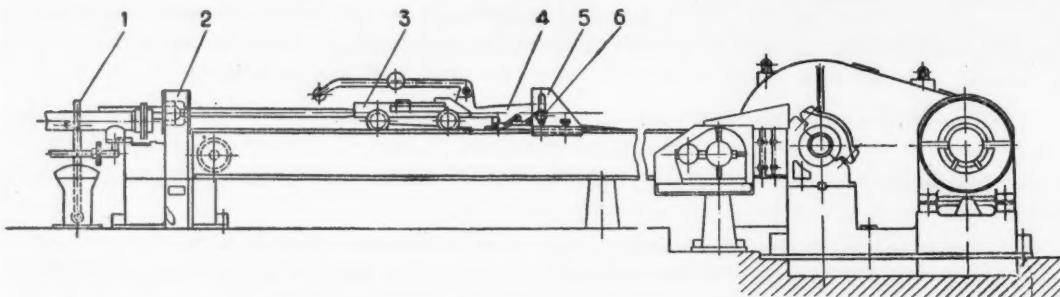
Plant with bogey stop for wire drawing: 1) rod-shift pneumatic drive control; 2) collar plate; 3) bogey; 4) grapple with tapered face; 5) bearing plate for bogeystop; 6) roller for disengaging grapple from the driving chain.
